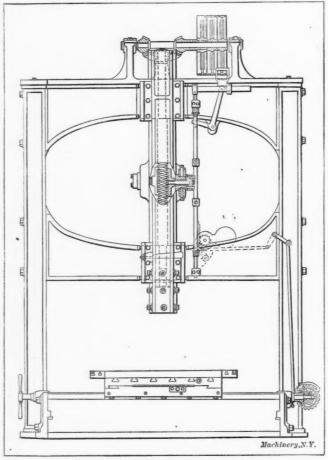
Slotting Machine, Screw-driven. Front Elevation.
